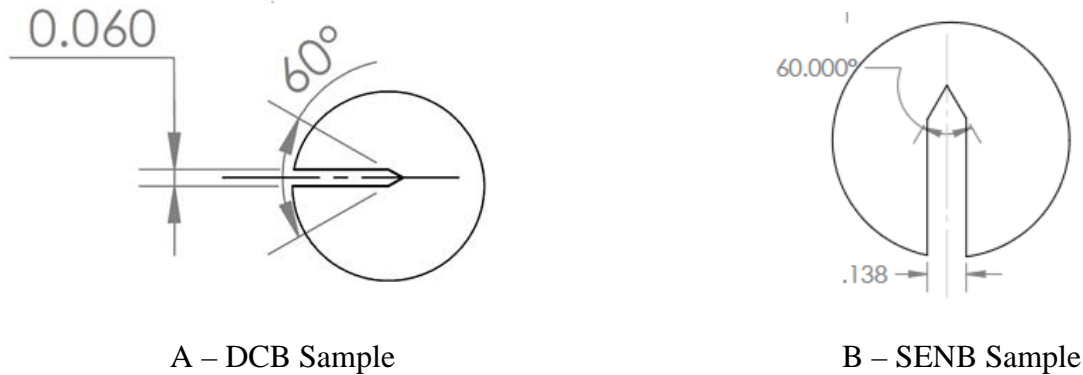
Detailed view of Chevron notch crack starter with dimensions provided in inches
